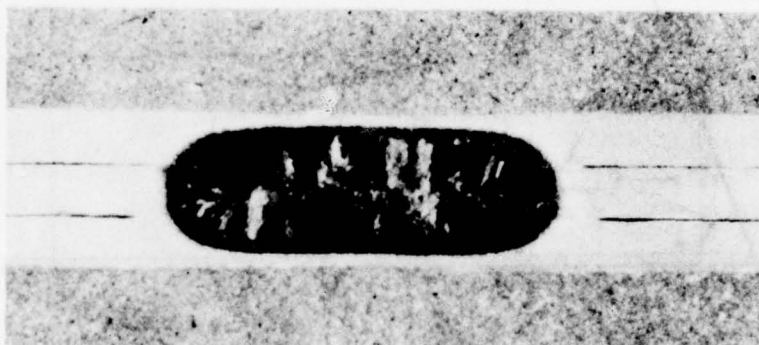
EFFECT OF WELDING CURRENT ON SPOT WELD
